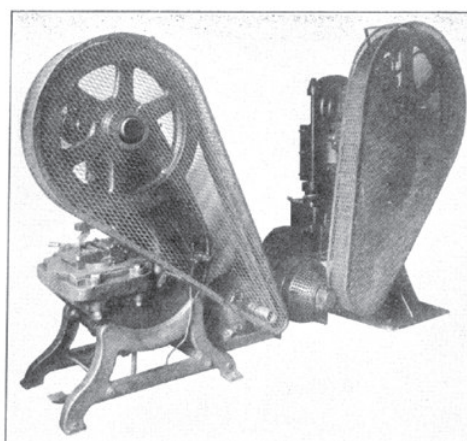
Punch presses with individual motor drive and belt enclosure. Special base plates for the motors form an integral part of the machines. The belts and pulleys have been suitably enclosed by guards of expanded metal and angle iron.
